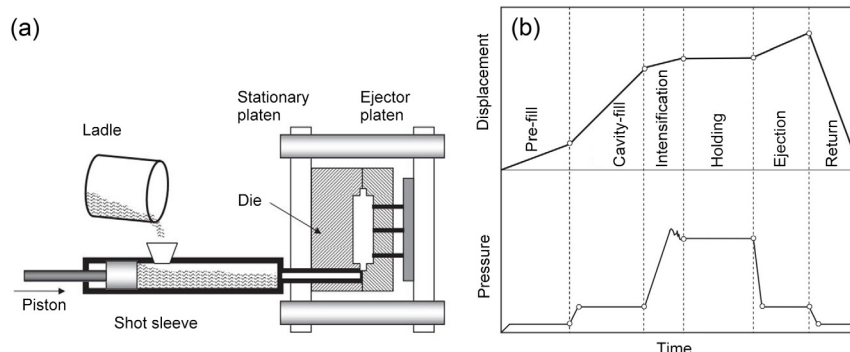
Schematic of a cold chamber die-casting machine (a), and stages of the shot profile for die casting process showing changes of melt pressure and plunger displacement versus time (b)^[91]
